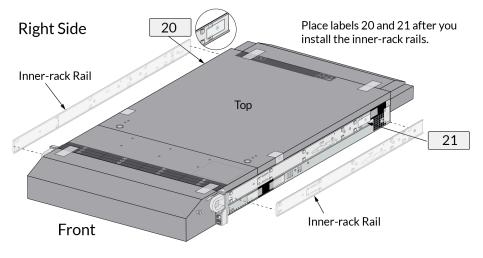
WF-500-B: Tamper Seals Location for Side Rails
